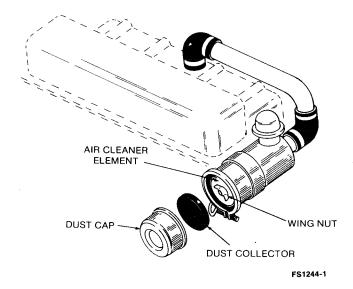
HEAVY DUTY AIR CLEANER
